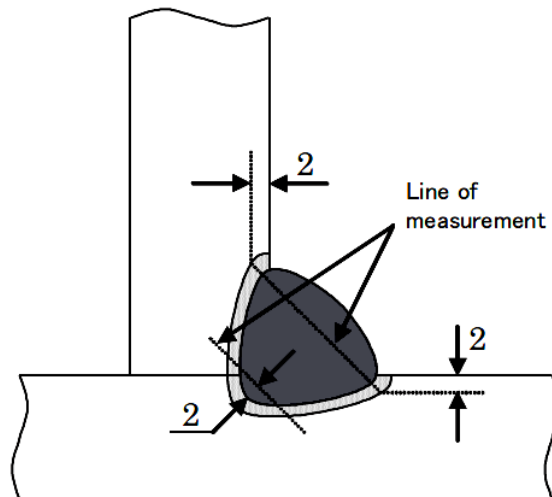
Test Assembly for Fillet Weld Joints (Unit: mm)
